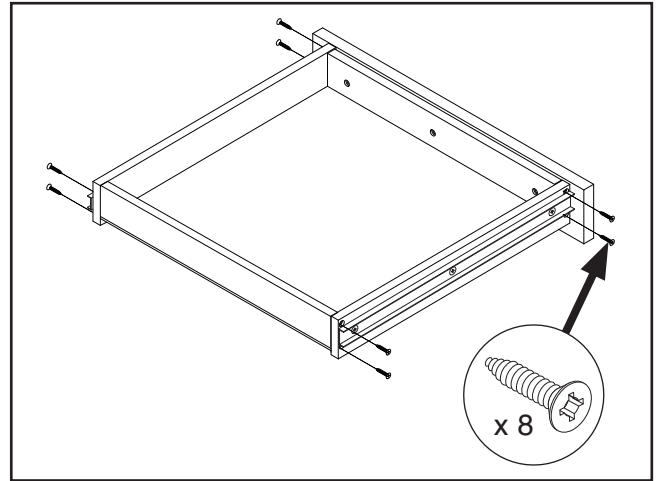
Securing left and right drawer panels to front and rear drawer panels.
